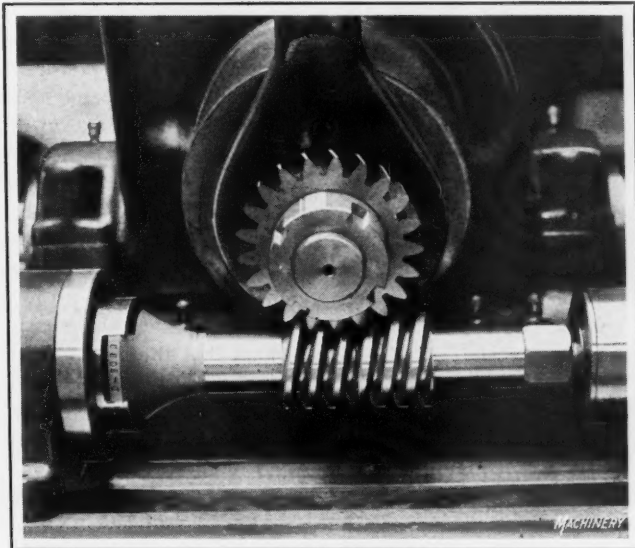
Close-up View of a Thread-generating Cutter producing Two Double-thread Forms
